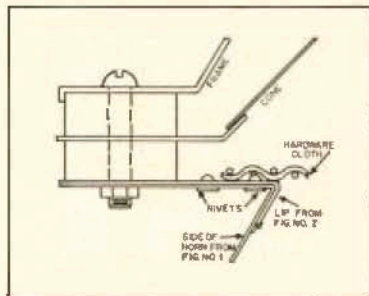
Detail of the mounting of the speaker on the flange and horn.
